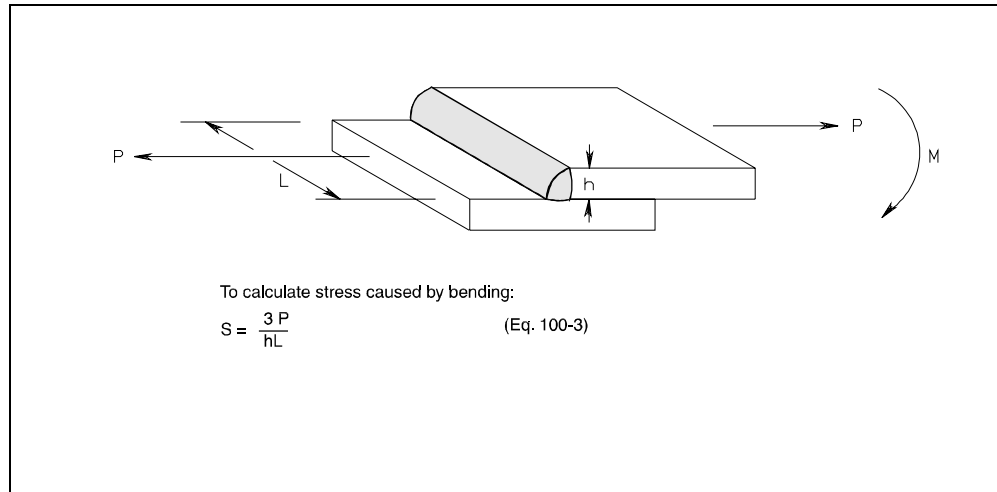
Single Fillet Weld with Parallel Loading (Courtesy of the American Welding Society)
